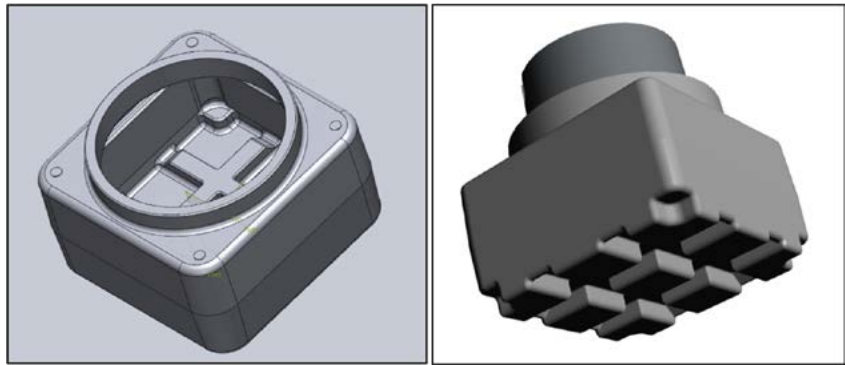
left: schematic view of an explosion-proof instrument housings; right: drawing of the developed core (courtesy Limatherm S.A. Poland)
